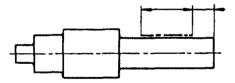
DIMENSIONING AN ASSEMBLY
